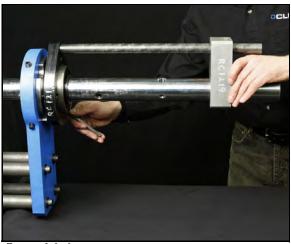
ALIGNMENT TOOL OVER THE MOUNTING ROD
